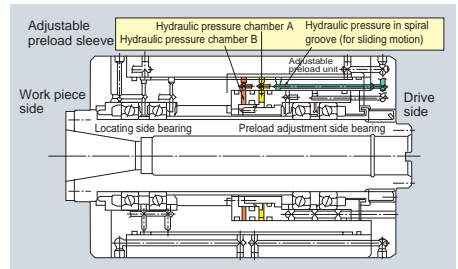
Typical spindle configuration incorporating 3-step Adjustable Preload Type Bearing Unit
